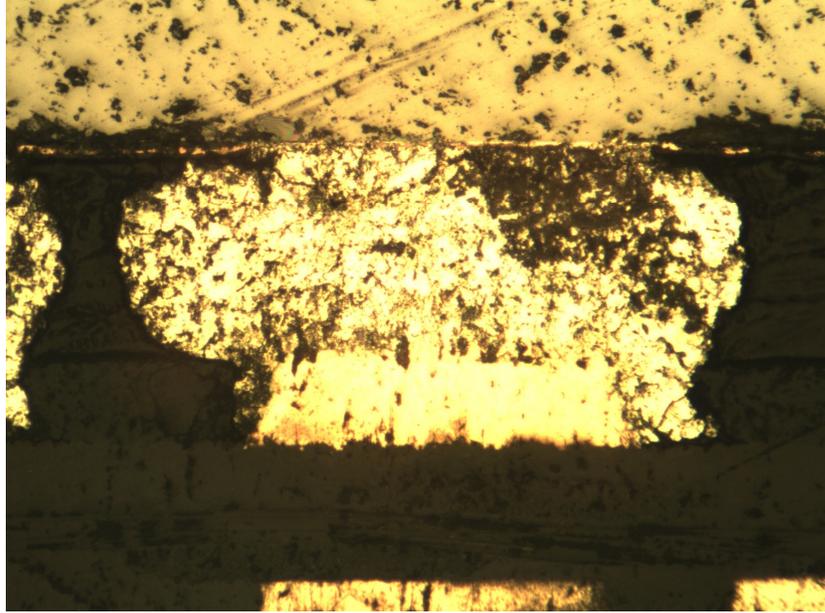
Hot Melt 2 on FR4 Test Board CSP Image
